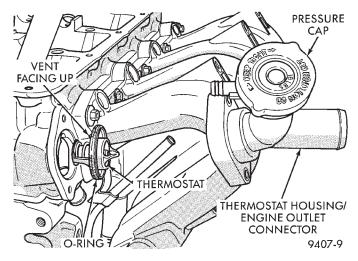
Thermostat/Engine Outlet Connector—2.0L Engine
